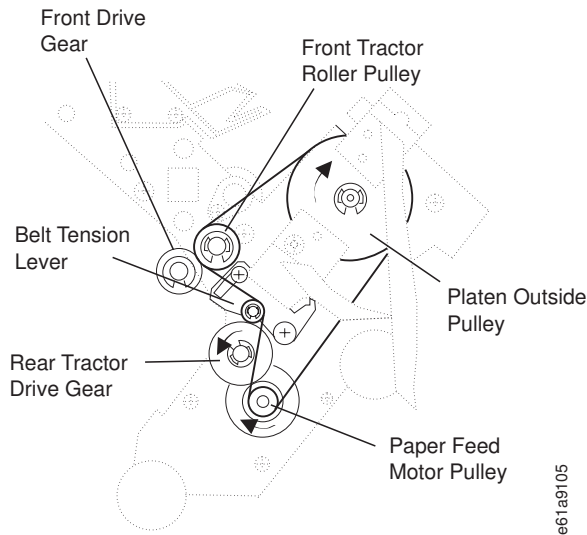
Paper feed main drive. (Viewed from right side) arrows show forward (up) paper feed.
